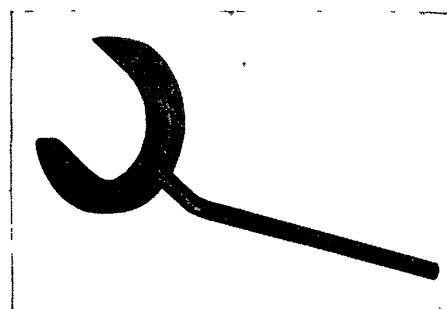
Special tool use between pinion and bearing to assist in seating single row bearing on 1935-48 axles
